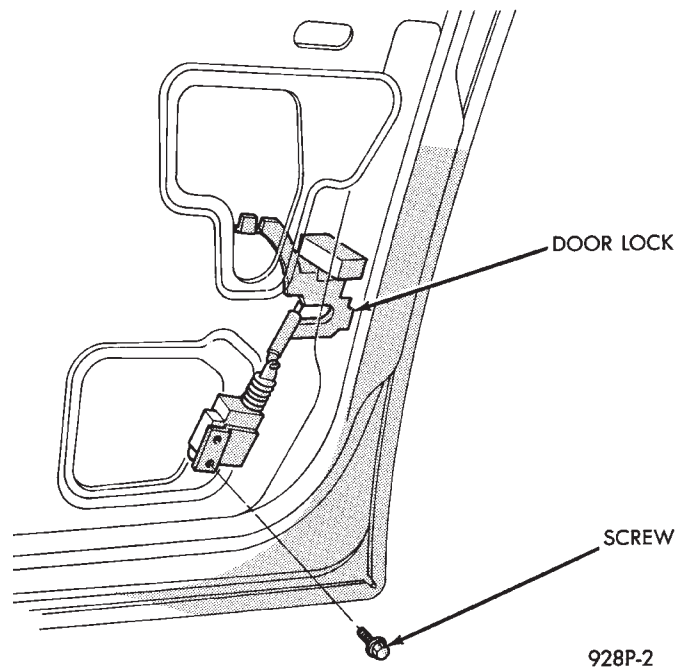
Rear Power Door Lock Motors – AA and AP Bodies
